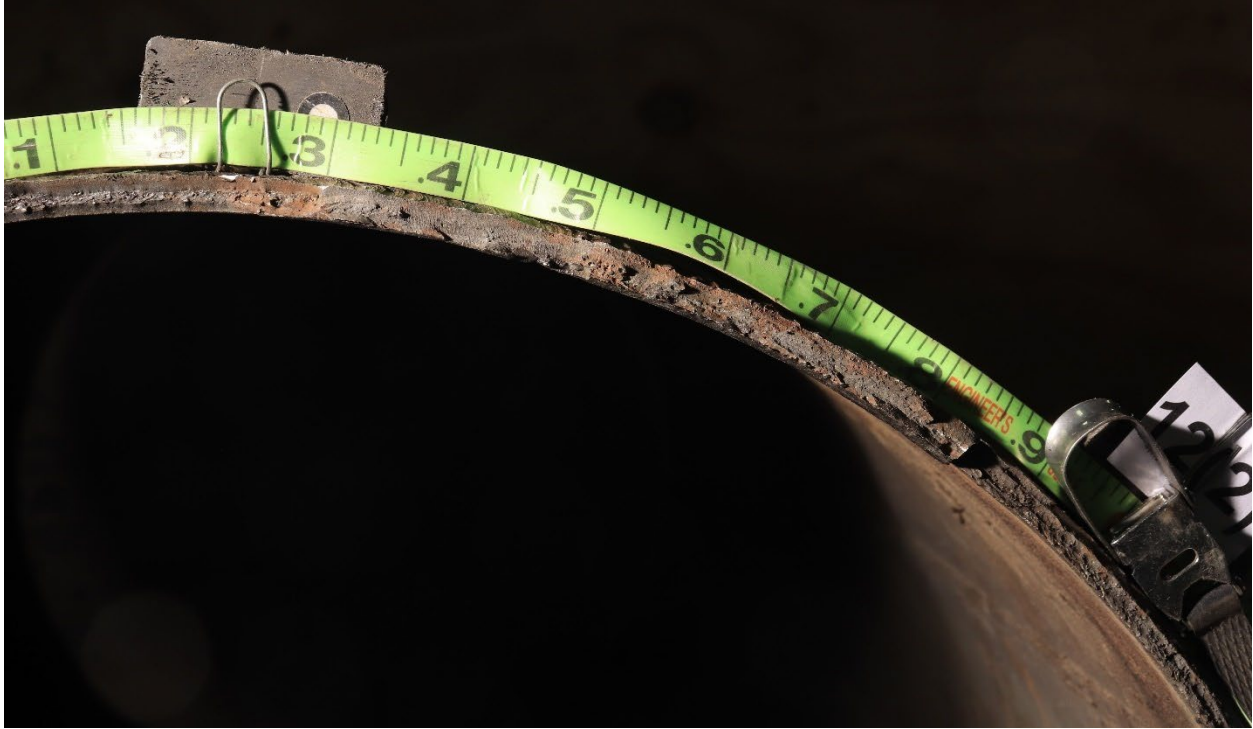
View of the Pipe 2 fracture surface counterclockwise of the 12 o'clock position.
